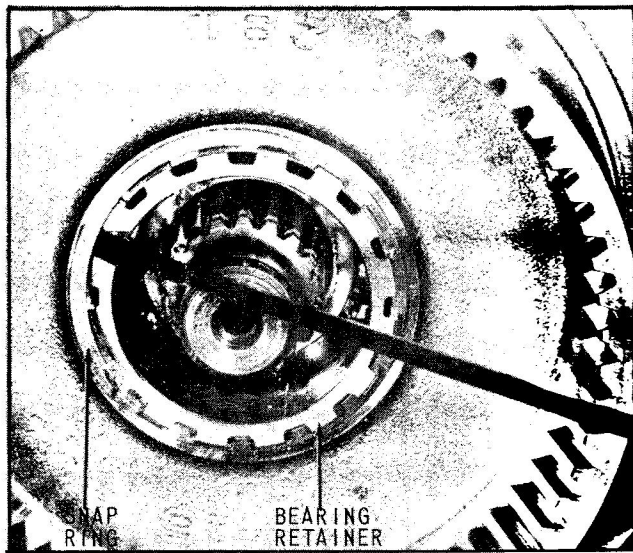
Remove Ring Gear Hub Snap Ring (3 to 1 Ratio)
